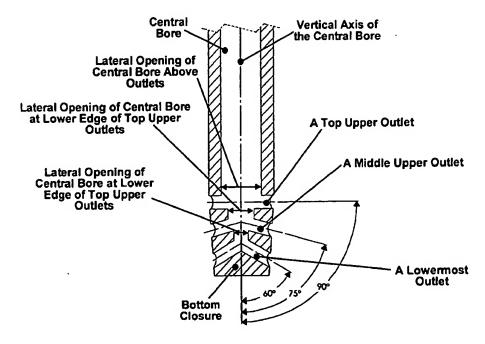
Section View of a Second Embodiment of a Casting Nozzle of the Invention
